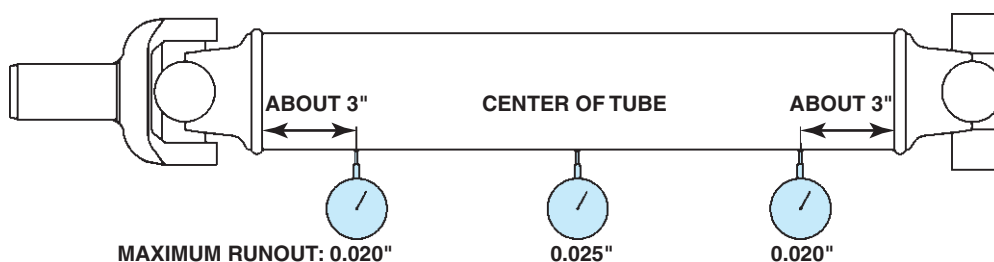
Driveshaft runout is checked at the center and near the ends of the tube section.
